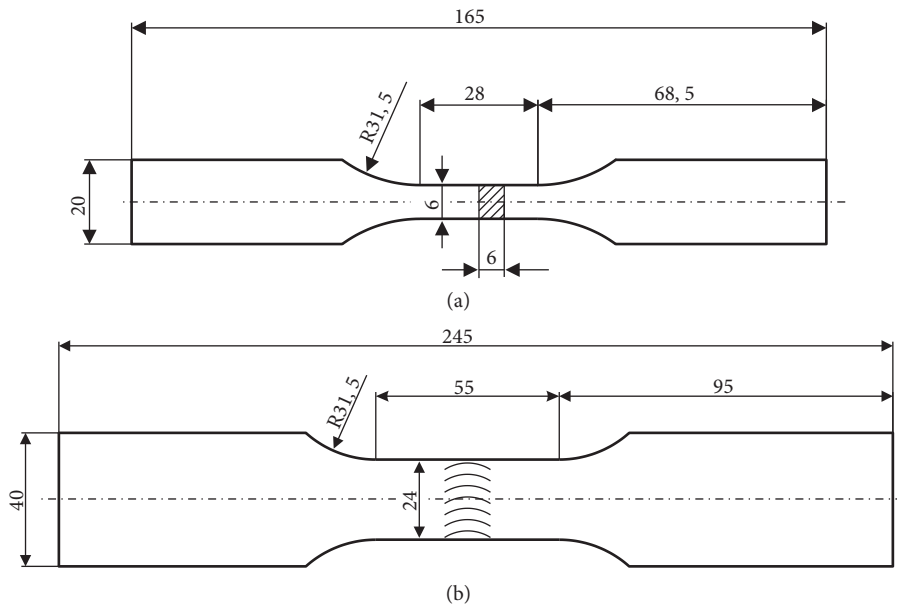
Dimensions of samples used in fatigue tests conducted on the paternal material (a) and welded joints (b).
